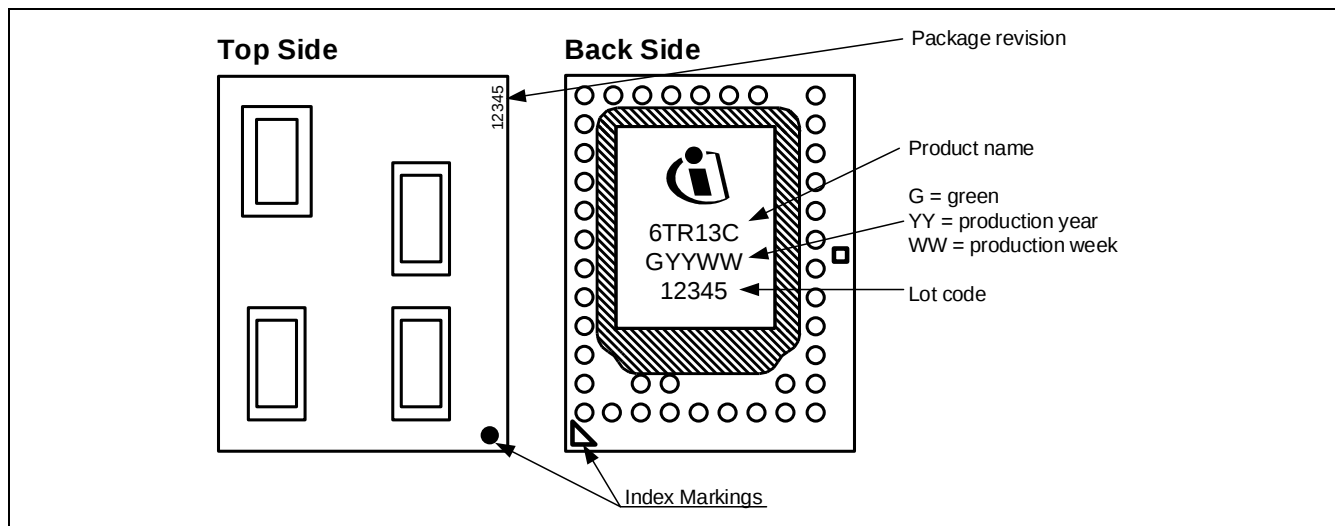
Marking layout of PG-VF2BGA-40-1 (example)
